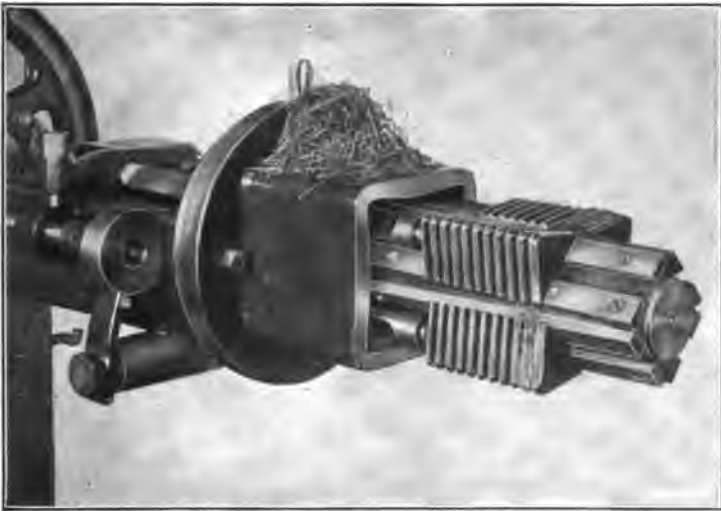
The Taper Broach used for Broaching the Steel Casting shown in Fig. 22
